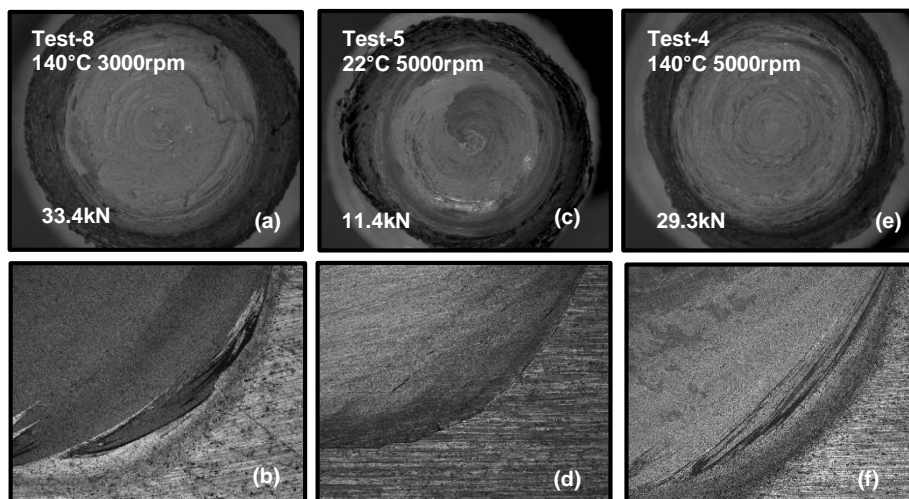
60° FHPP Welds with Cold Forge Defect
